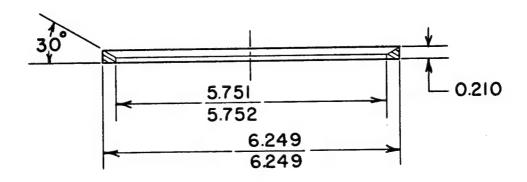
DIMENSIONS OF STEM AND MANDREL MITER RING SEALS
